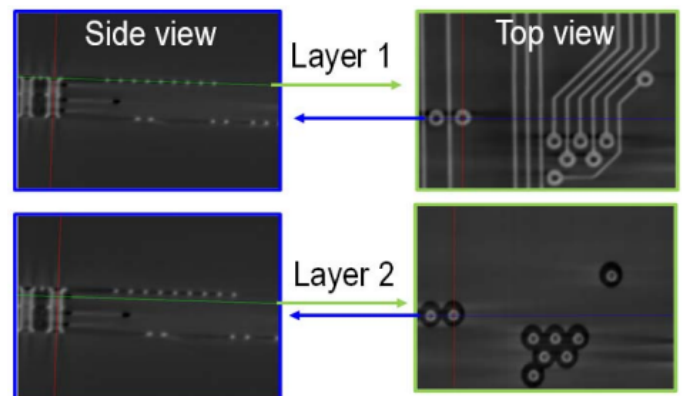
X-Ray Technology in PCB Visual Inspection Systems
